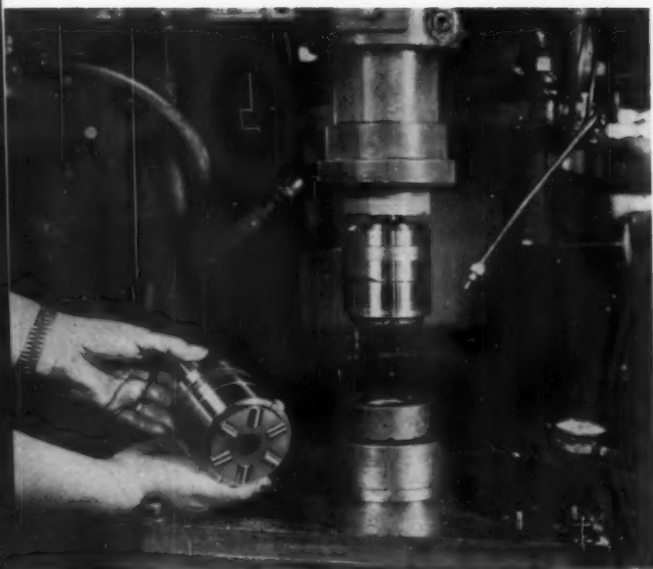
Tools used for processing covers shown in Fig. 1. Tool life is 10 days of three shifts or a total of about 8500 pieces per set of rolls.
